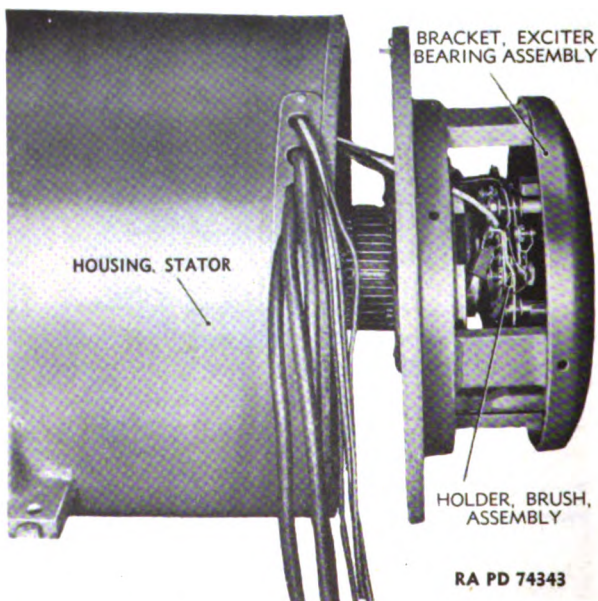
Exciter Bearing Bracket Removal — H. B. Co. Unit
